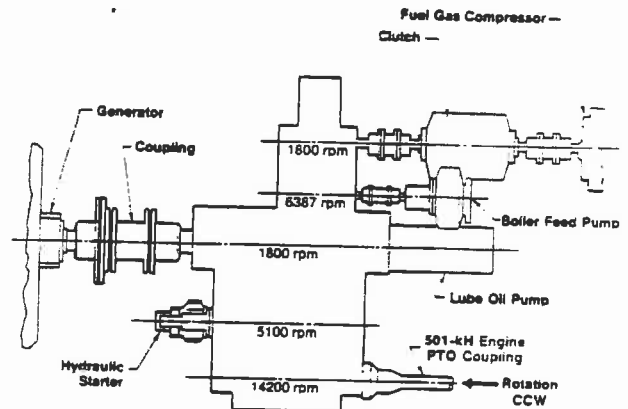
SYSTEM GEARBOX - PLAN VIEW
